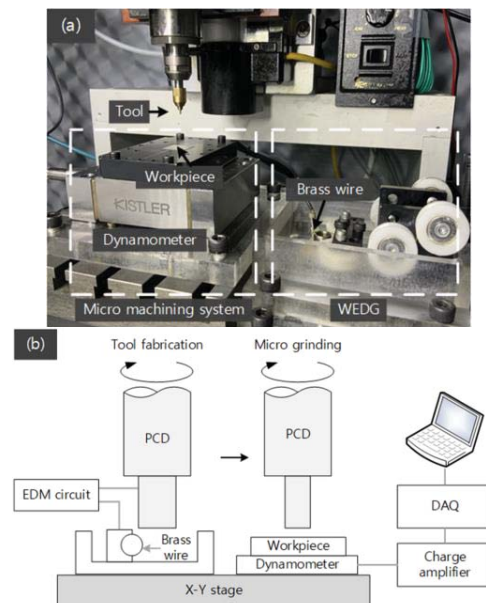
(a) photo of machining system (b) schematic of the machining process
